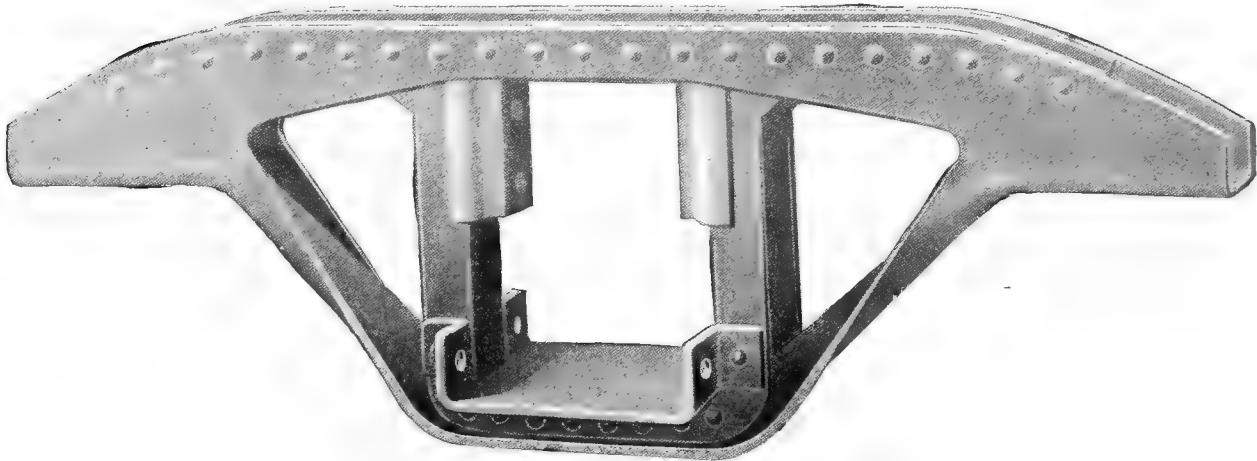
Forsythe Forged Steel Truck Side Frame. Allegheny Steel Company.
